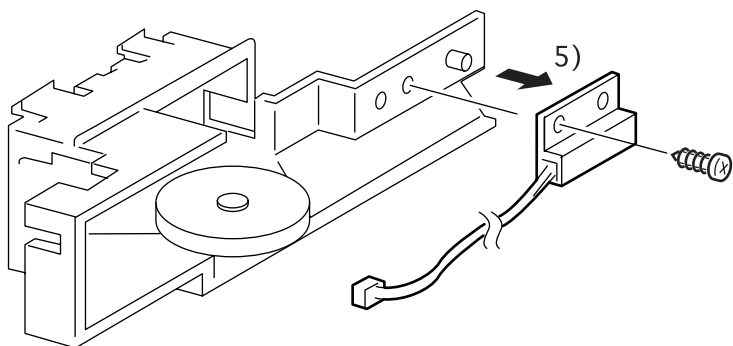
TRAY N/P SENSOR ASSEMBLY Removal
